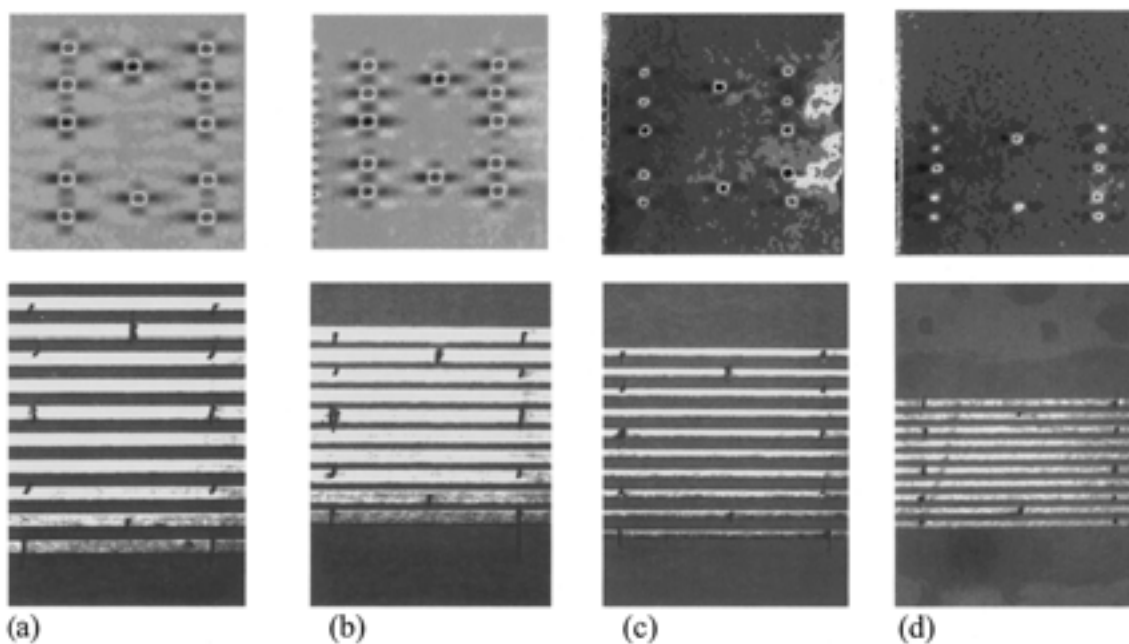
PCB models and inspection results (upper : ECT image, lower : photo image).
